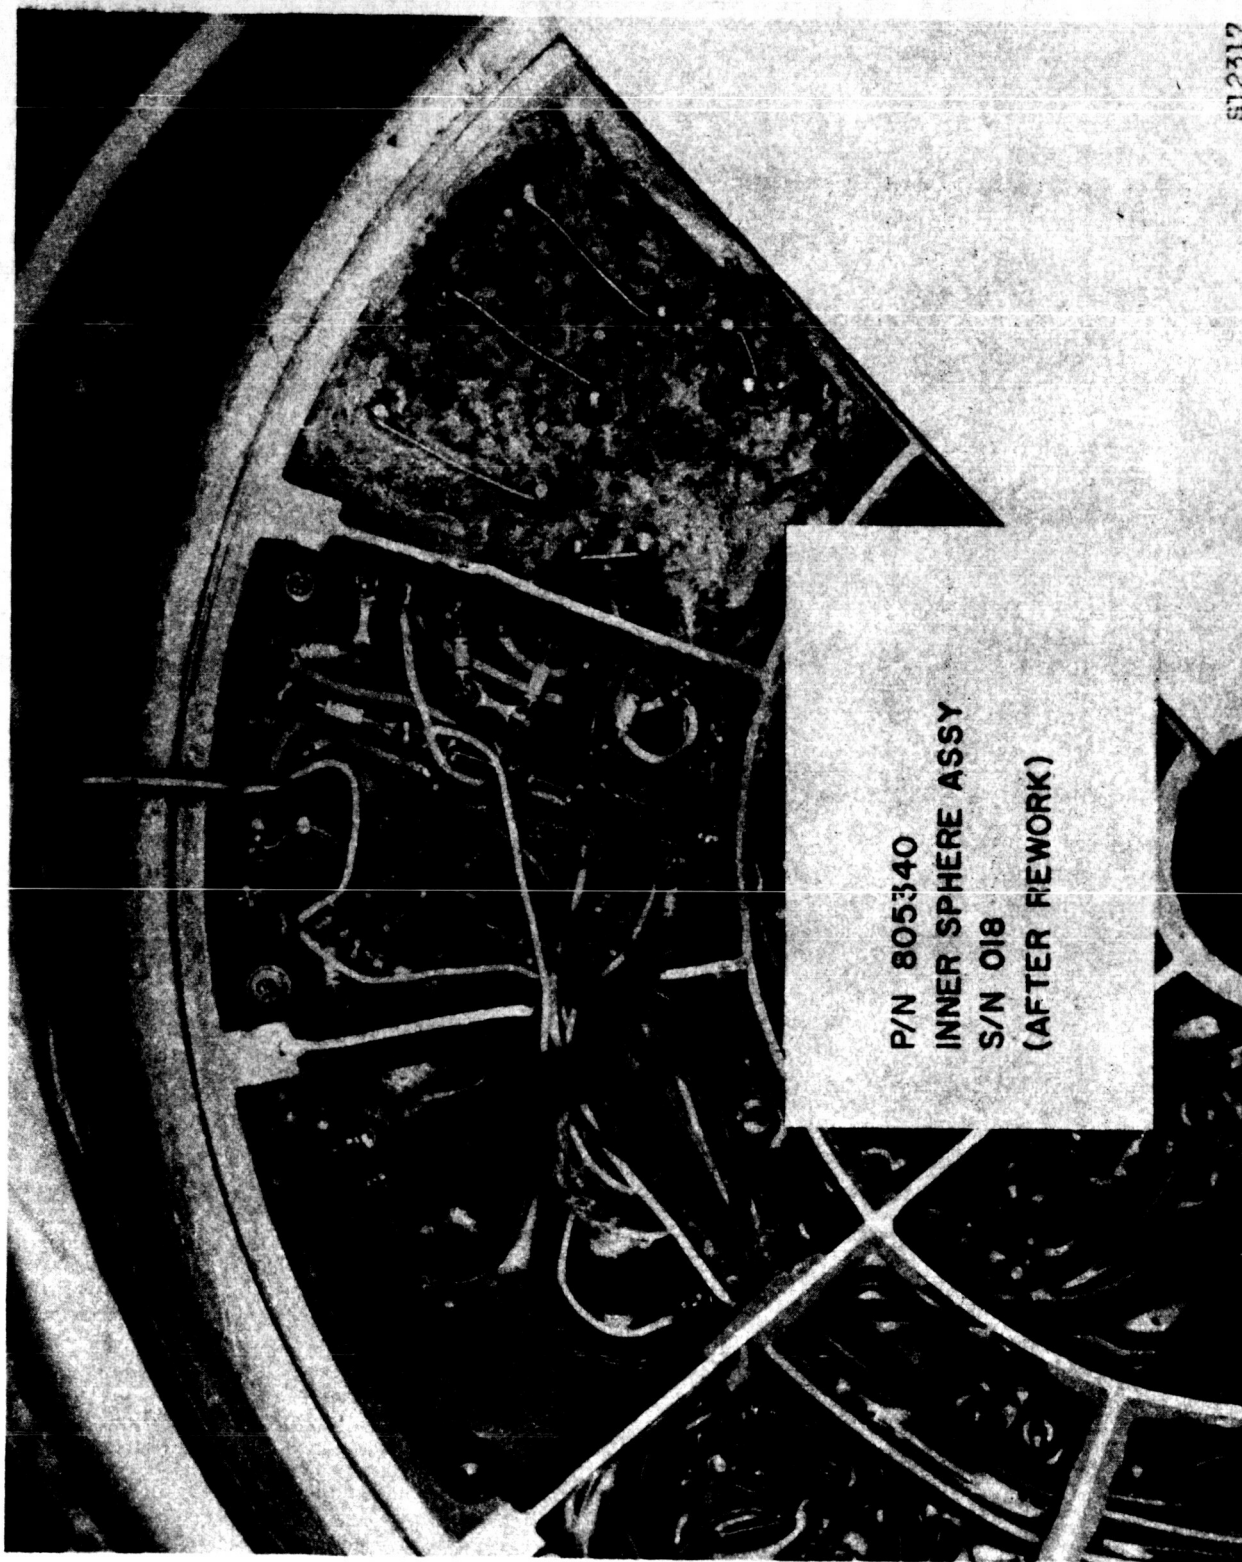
CAPSULE 018 INNER SPHERE ASSEMBLY (DURING REWORK)
